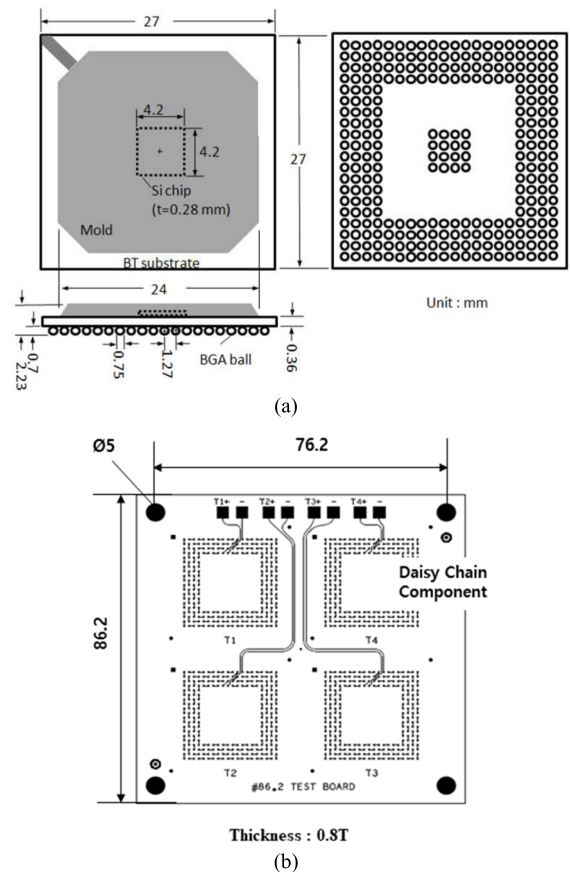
Diagram of (a) BGA package and (b) PCB design for experiment.
